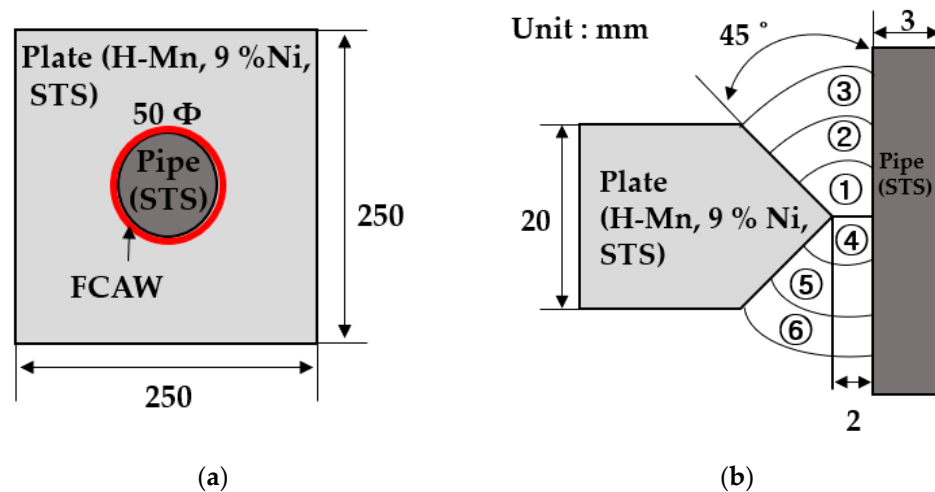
Test specimen dimensions and groove shape: (a) configuration of the test specimen; (b) groove shape.
